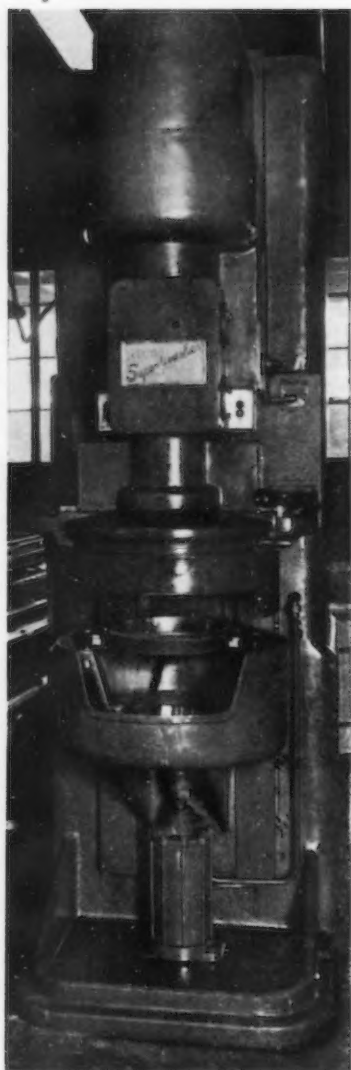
Single-spindle Superfinisher for brake drums is self-contained unit with separate motor drive, pneumatic lift for the fixture and automatic work clamp. Coolant reservoir is in the rear of the machine base and has filter. Shield surrounds the work during operation; safety controls are used.
